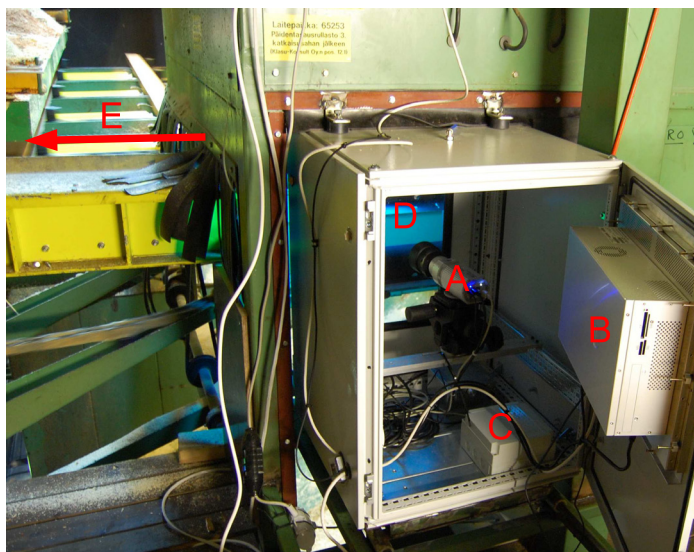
Developed measuring prototype. A is camera, B is industrial computer, C is control electronics and D is UV-light tubes and E is moving direction for the industrial line.
